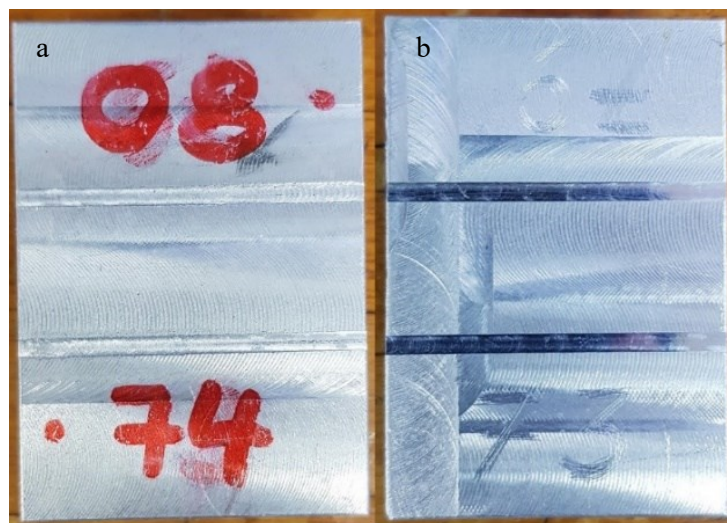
Cut Test Specimen for (a) Unstable and (b) Stable Cut
